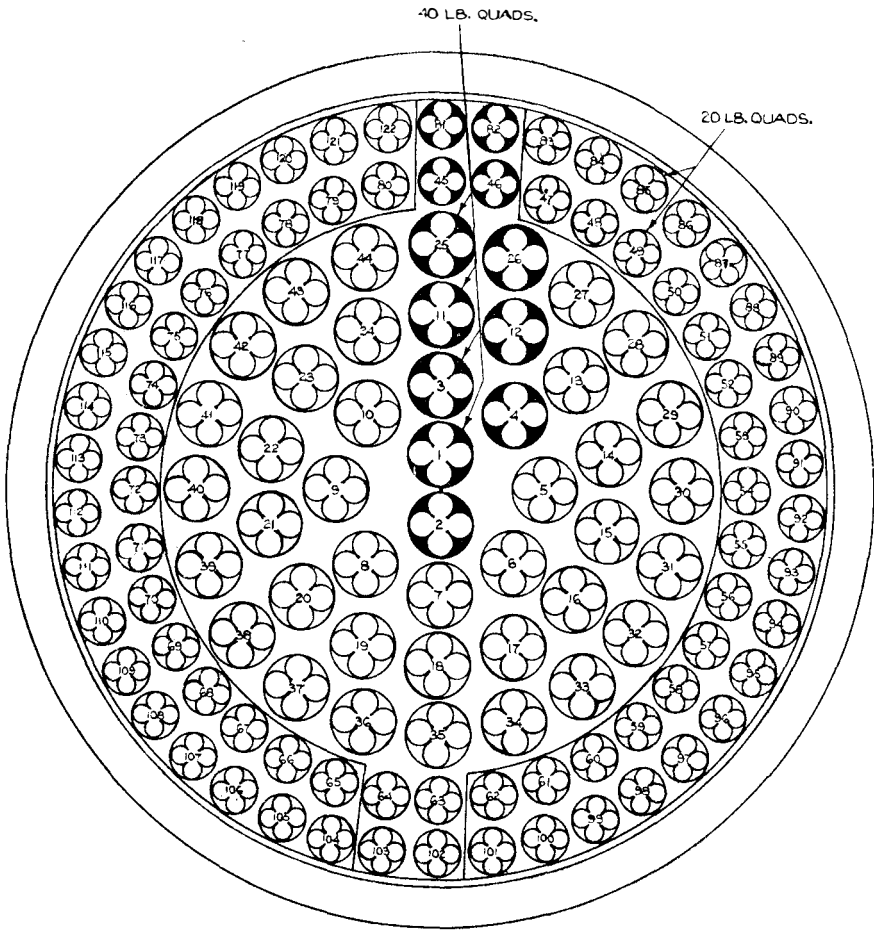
SECTION, LONDON-DERBY CABLE.
